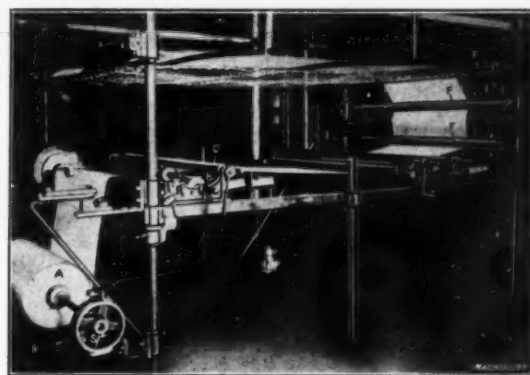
Side View of the Coating Machine and Dryer, Shown in Fig. 1.
